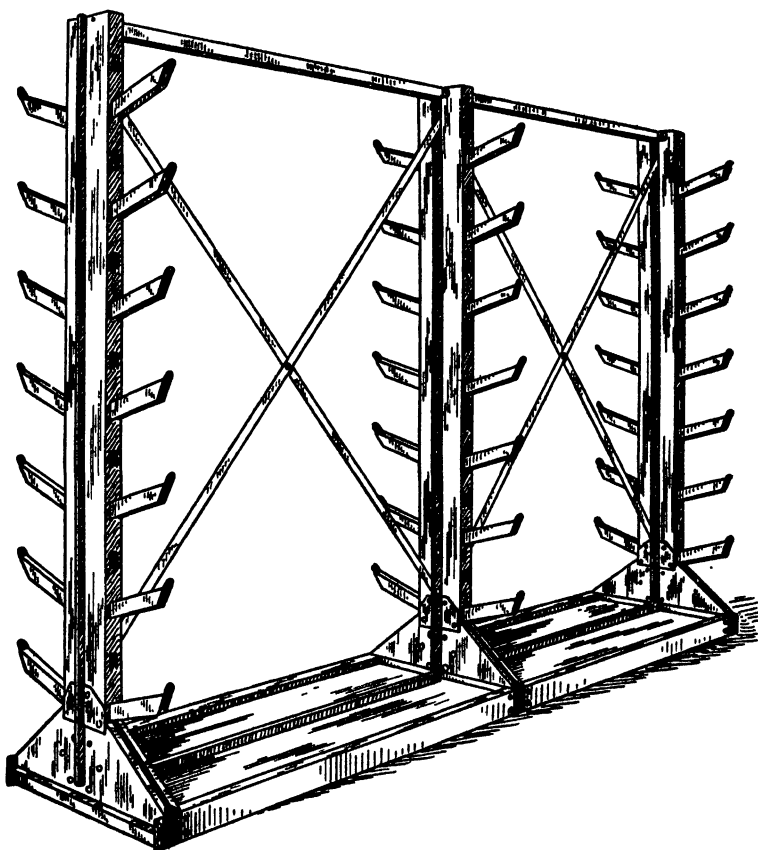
Rack for Lumber, Bar Stock, or Pipe
